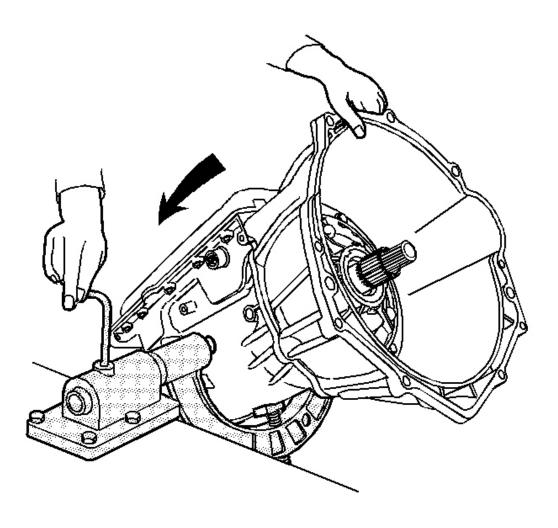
Removing Torque Converter Courtesy of GENERAL MOTORS CORP.
